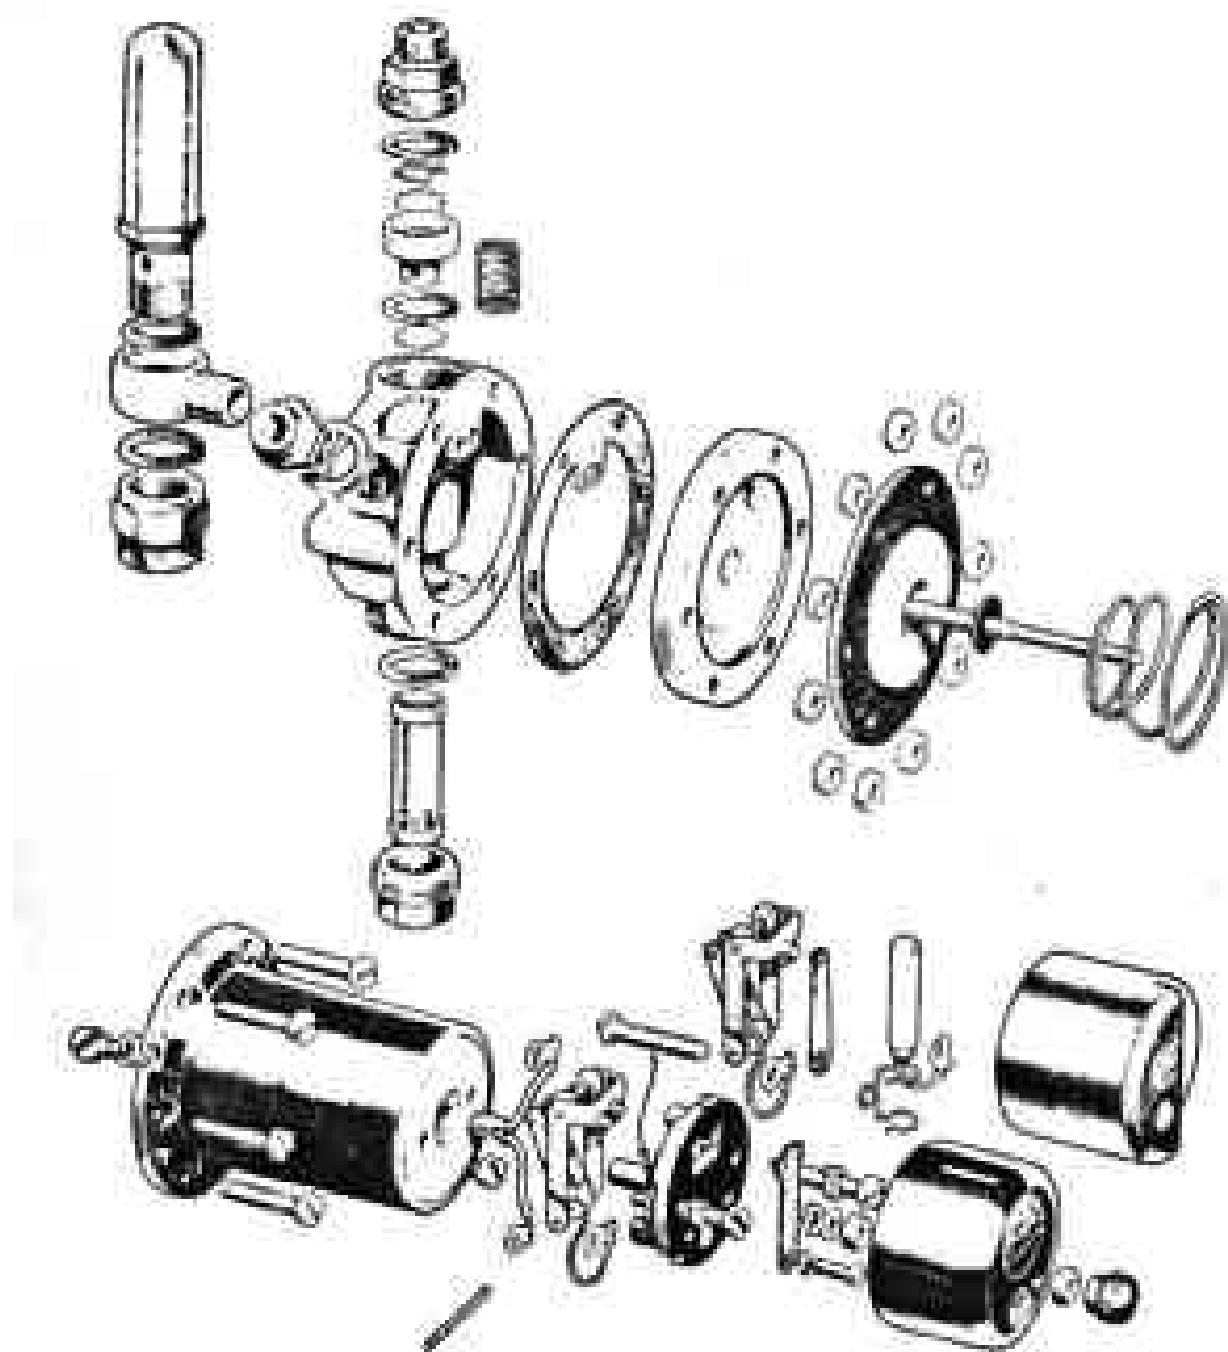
EXPLODED VIEW OF 'H.P.' TYPE S.U. FUEL PUMP
